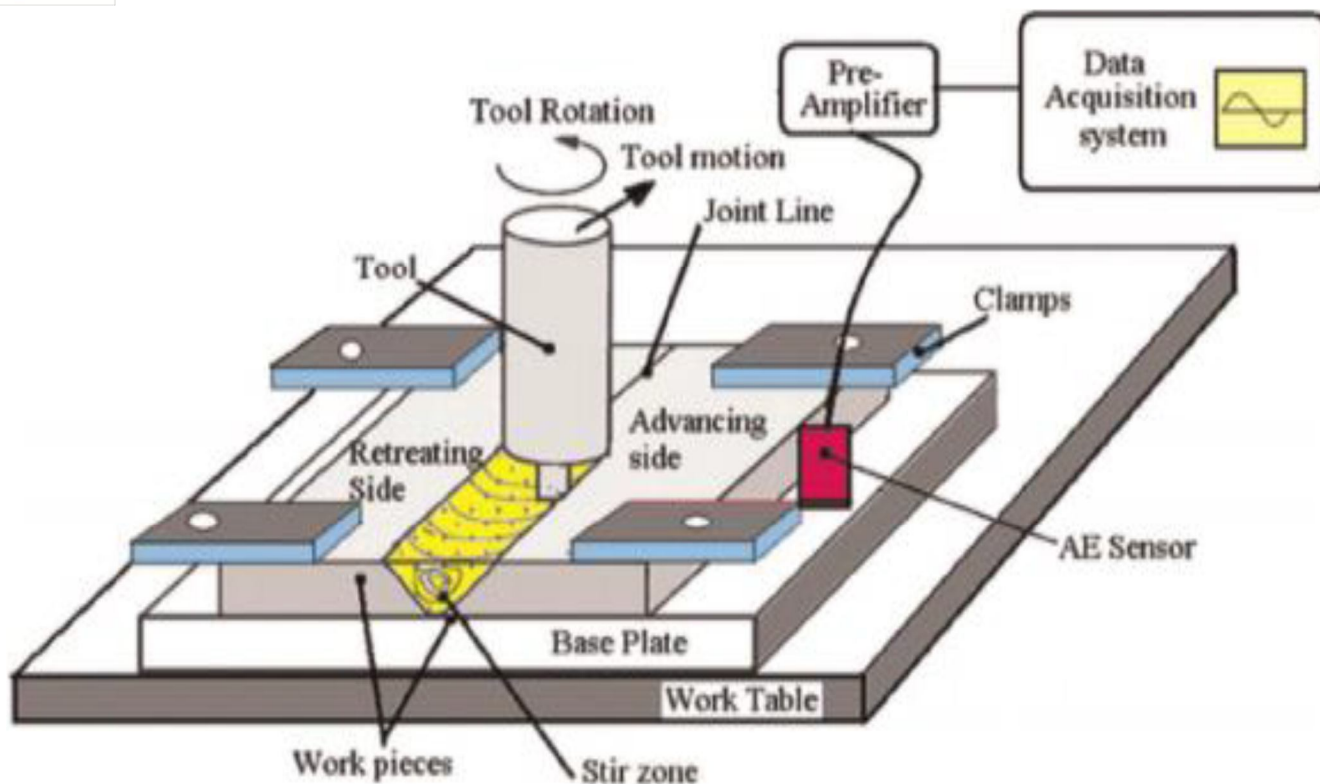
FIGURE :The principle of joining in the FSW welding process [6]
